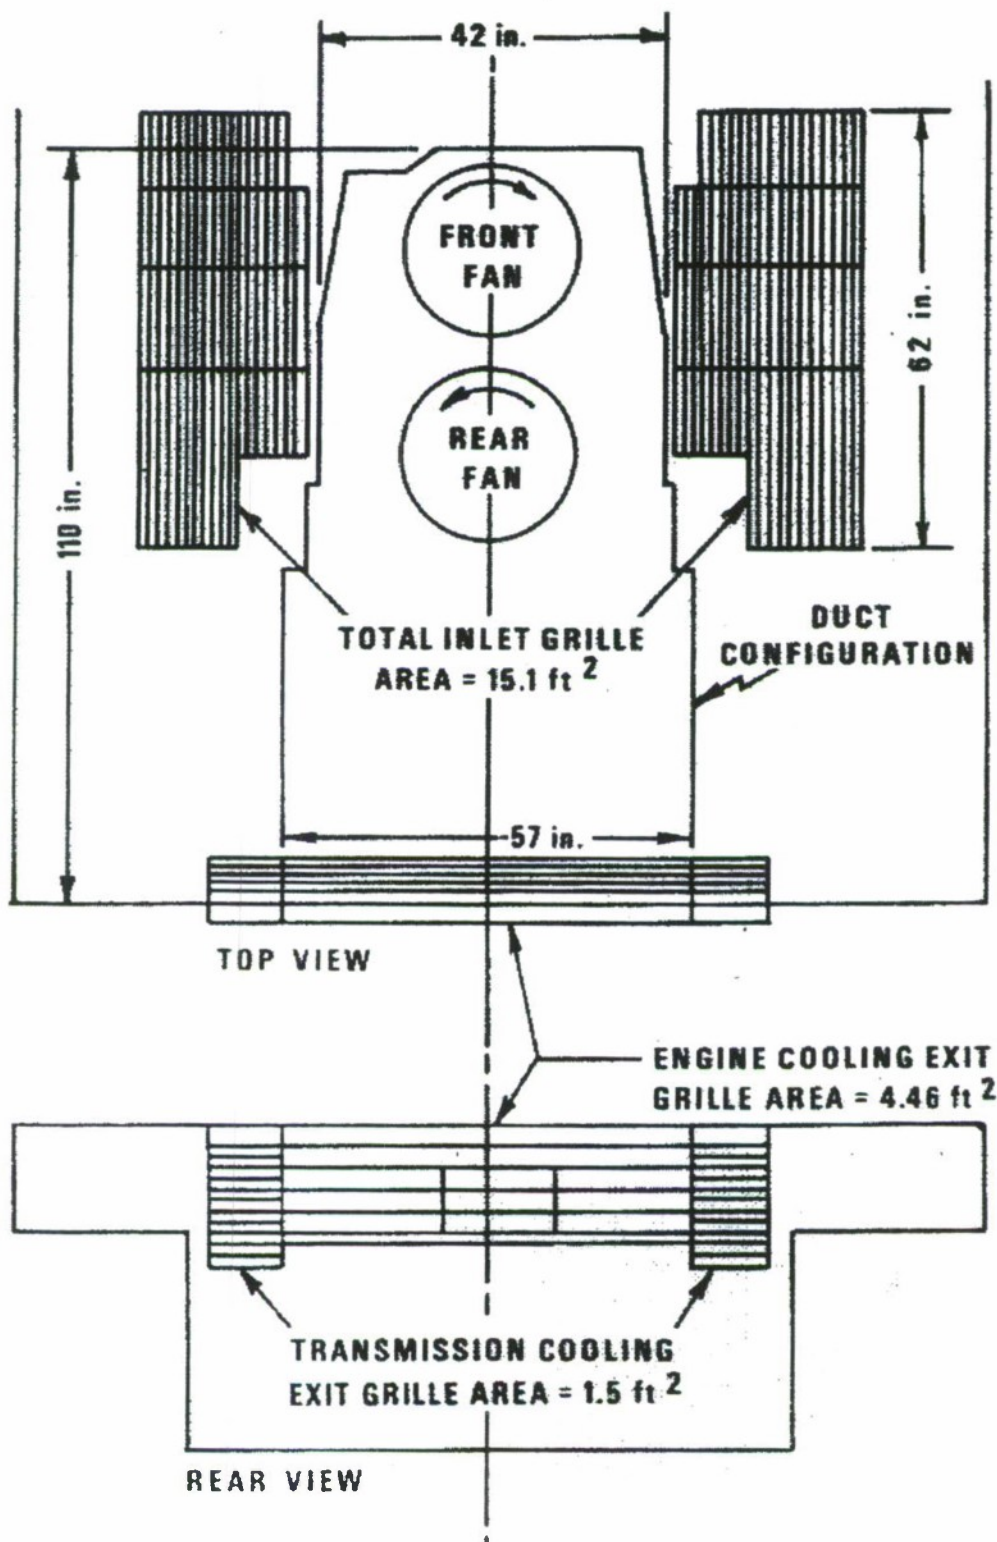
XM803 Experimental Tank Inlet and Exhaust Grille Configuration (Ref. 8)
